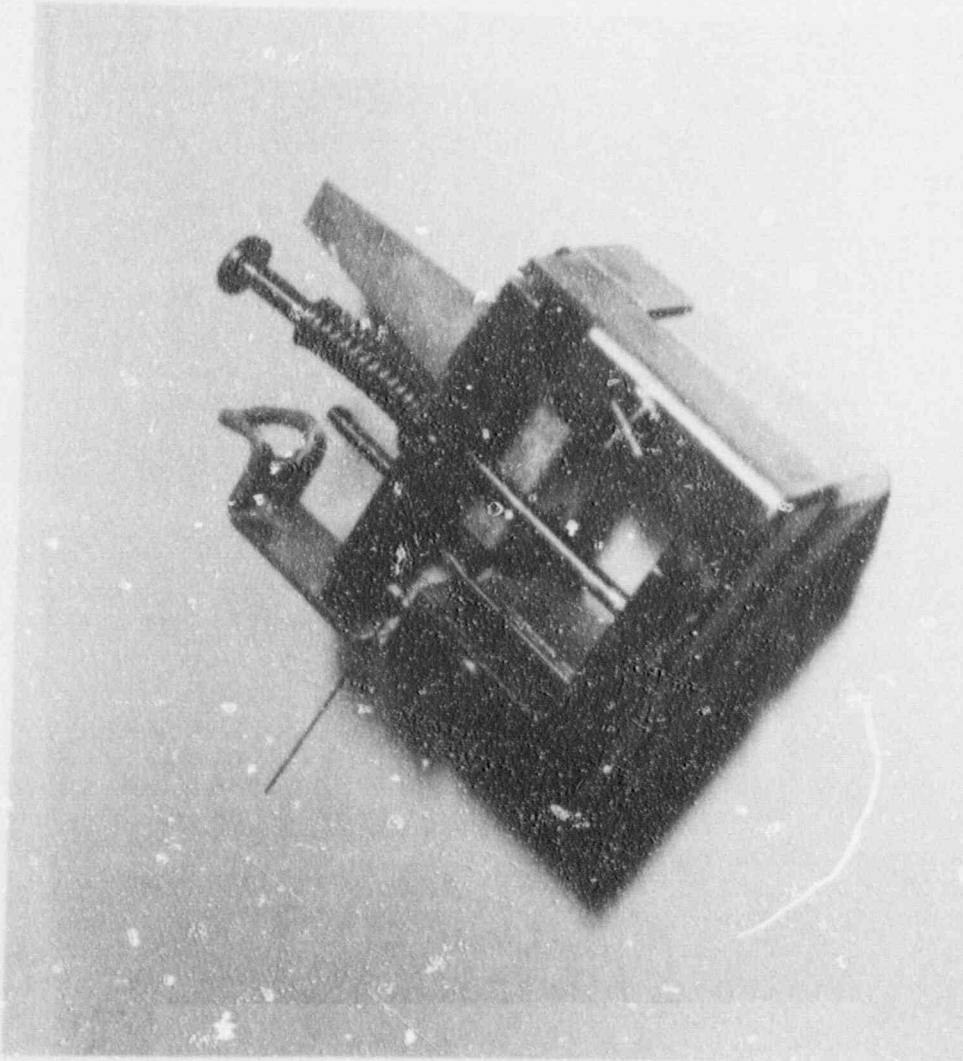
Root Cause Failure Analysis of Instantaneous Trip Plunger Assembly on Pole 2 of ITE KMB2F800 Molded Case Circuit Breaker, Showing Solidified Grease
